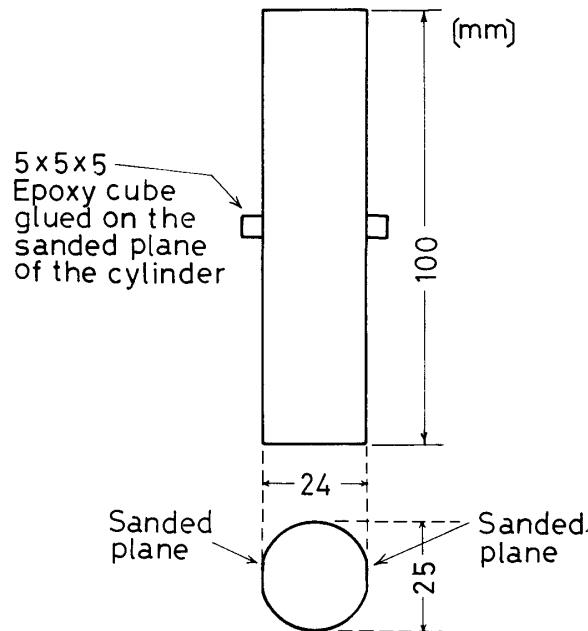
Compression specimen of epoxy bulk for measuring Poisson's ratio.
